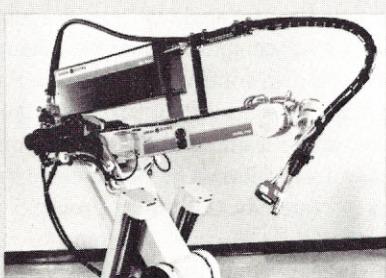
The MIG TRAK joint tracking system, shown mounted on GE's Model P60 welding robot, is designed for speedy, one-pass operations.
